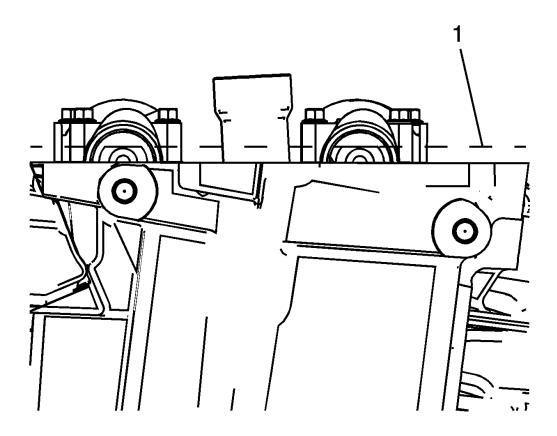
Right Cylinder Head Camshaft Intake And Exhaust Positioning Points Courtesy of GENERAL MOTORS COMPANY
